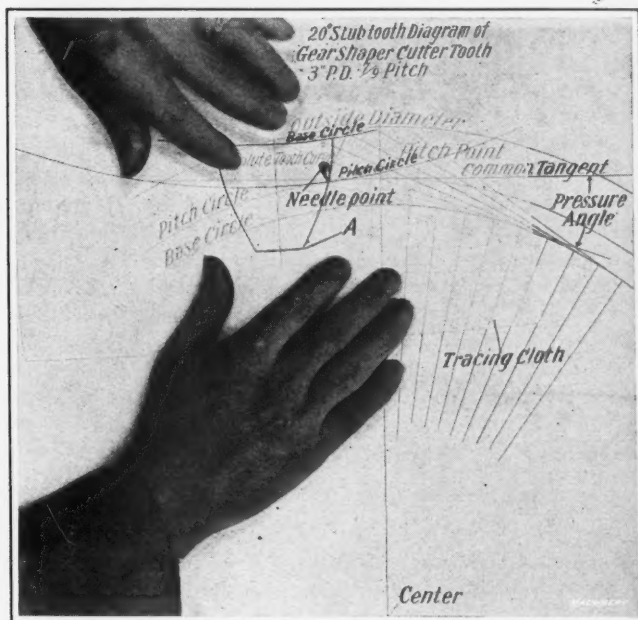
Diagram of Gear Shaper Cutter Tooth
